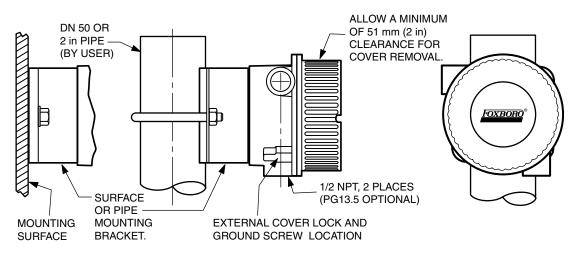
Surface or Pipe Mount with Remote Sensor (Housing Code S and T)
